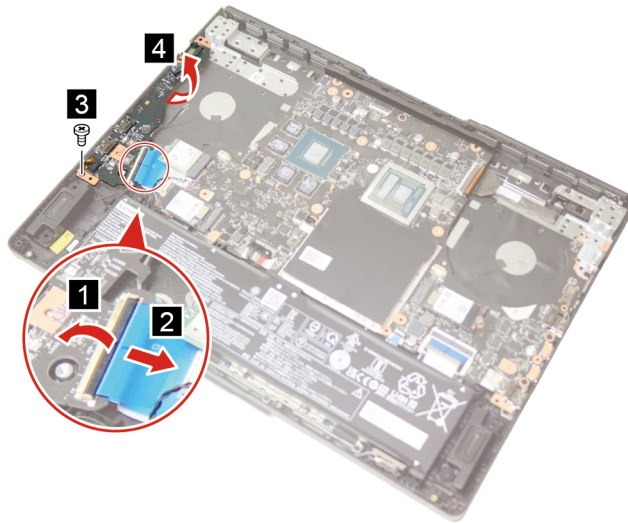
Disconnect the USB board cable, remove one screw, and remove the USB board
